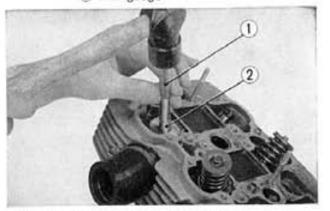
① Valve guide driving tool ② Valve guide
